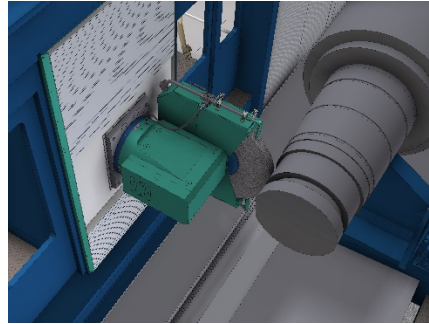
The ultraturn MC is suitable for the machining of rolls including grinding (picture) and the machining of roll necks.
